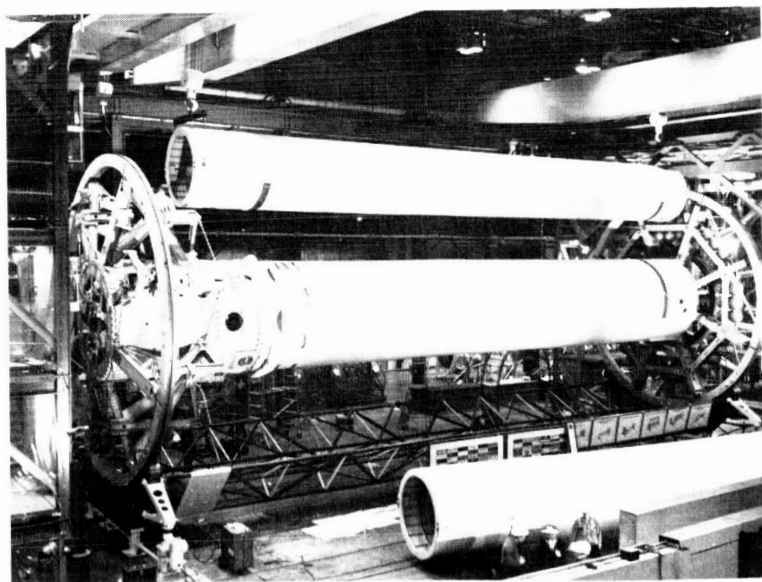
ASSEMBLY OF TANKS ON SA-1 BOOSTER
